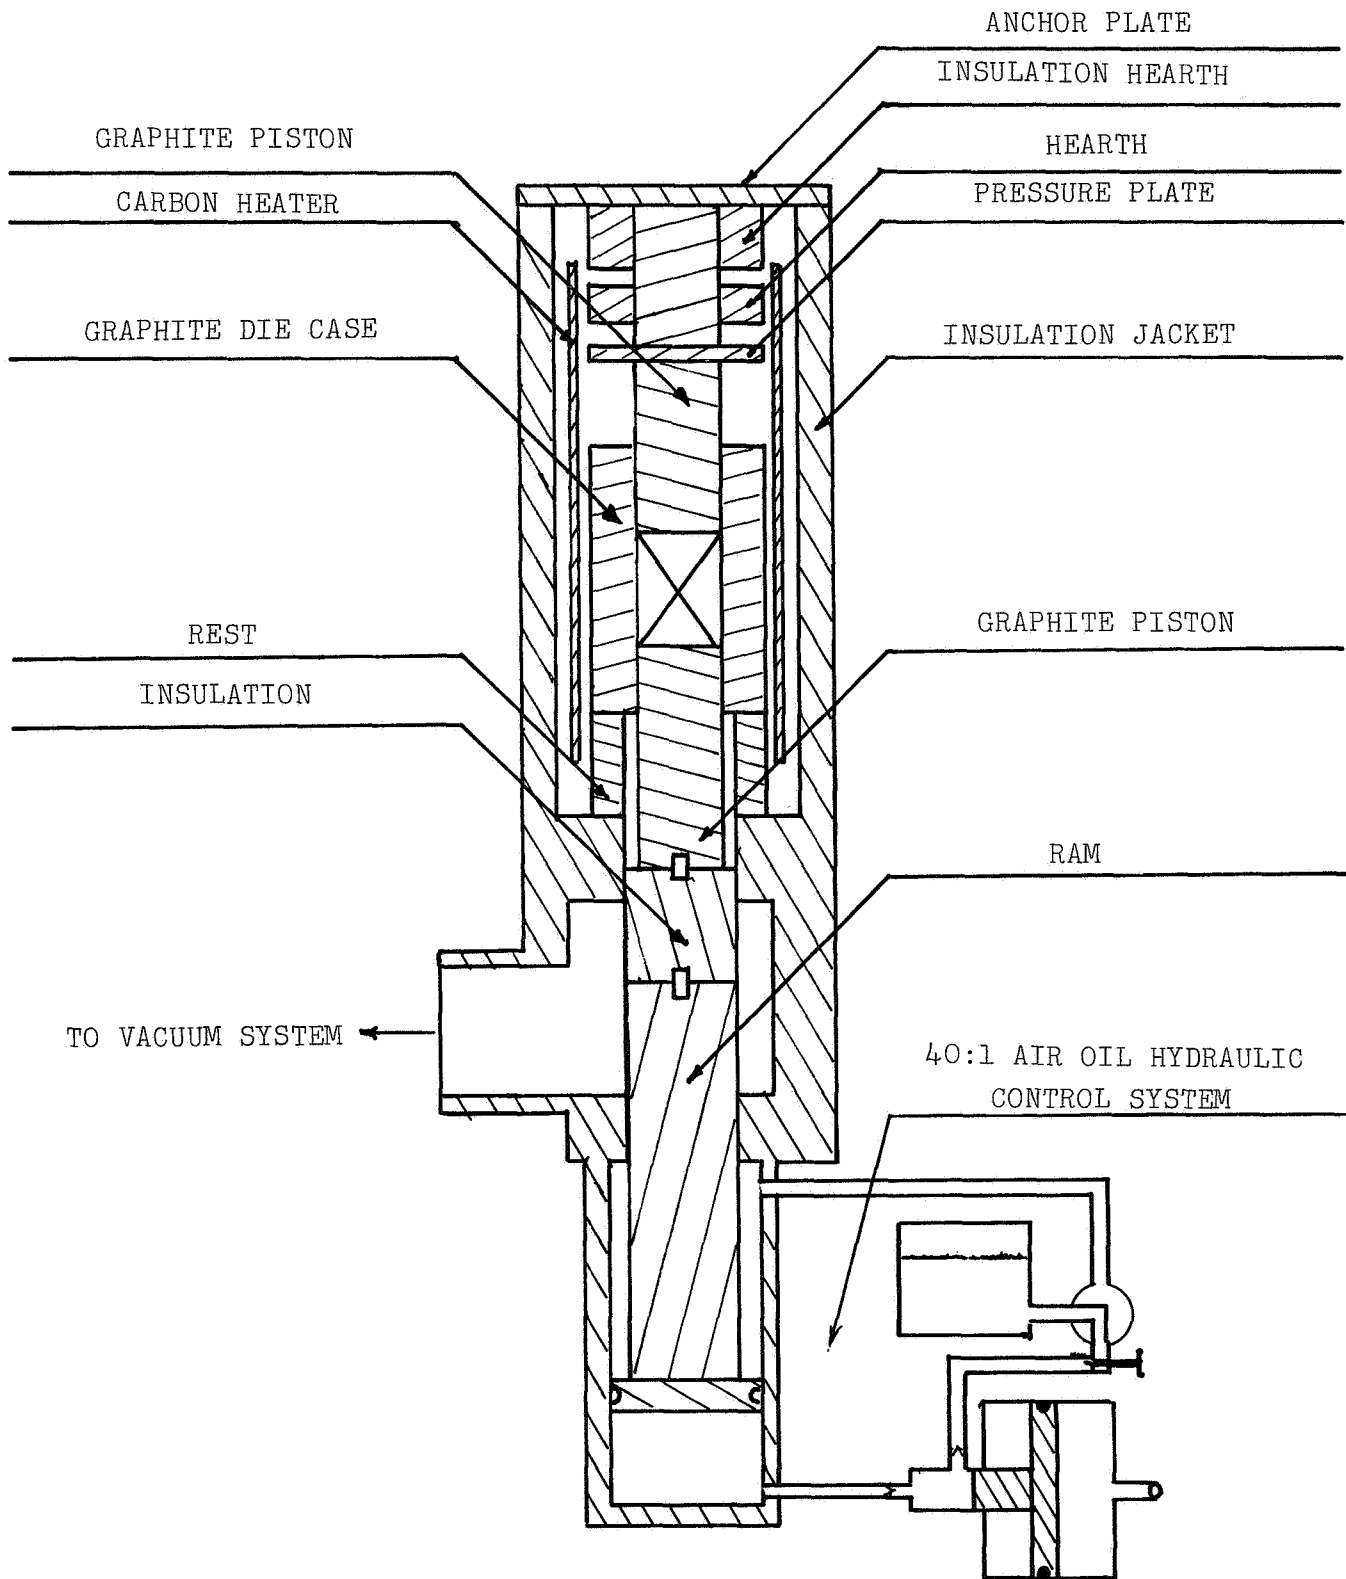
Schematic View of the Hot Press and Muffle Tube Assembly (Scale: 2 Inches = 1 Foot)
